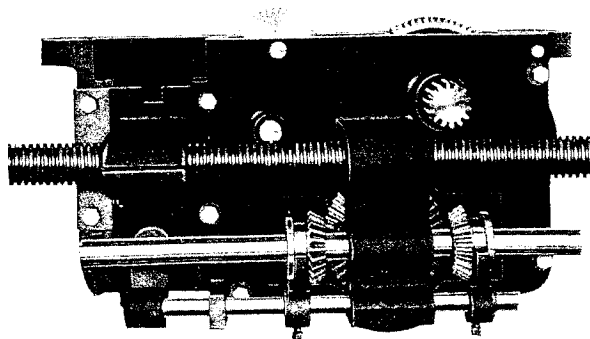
Apron used on 15, 17 and 19-inch Lathes.
